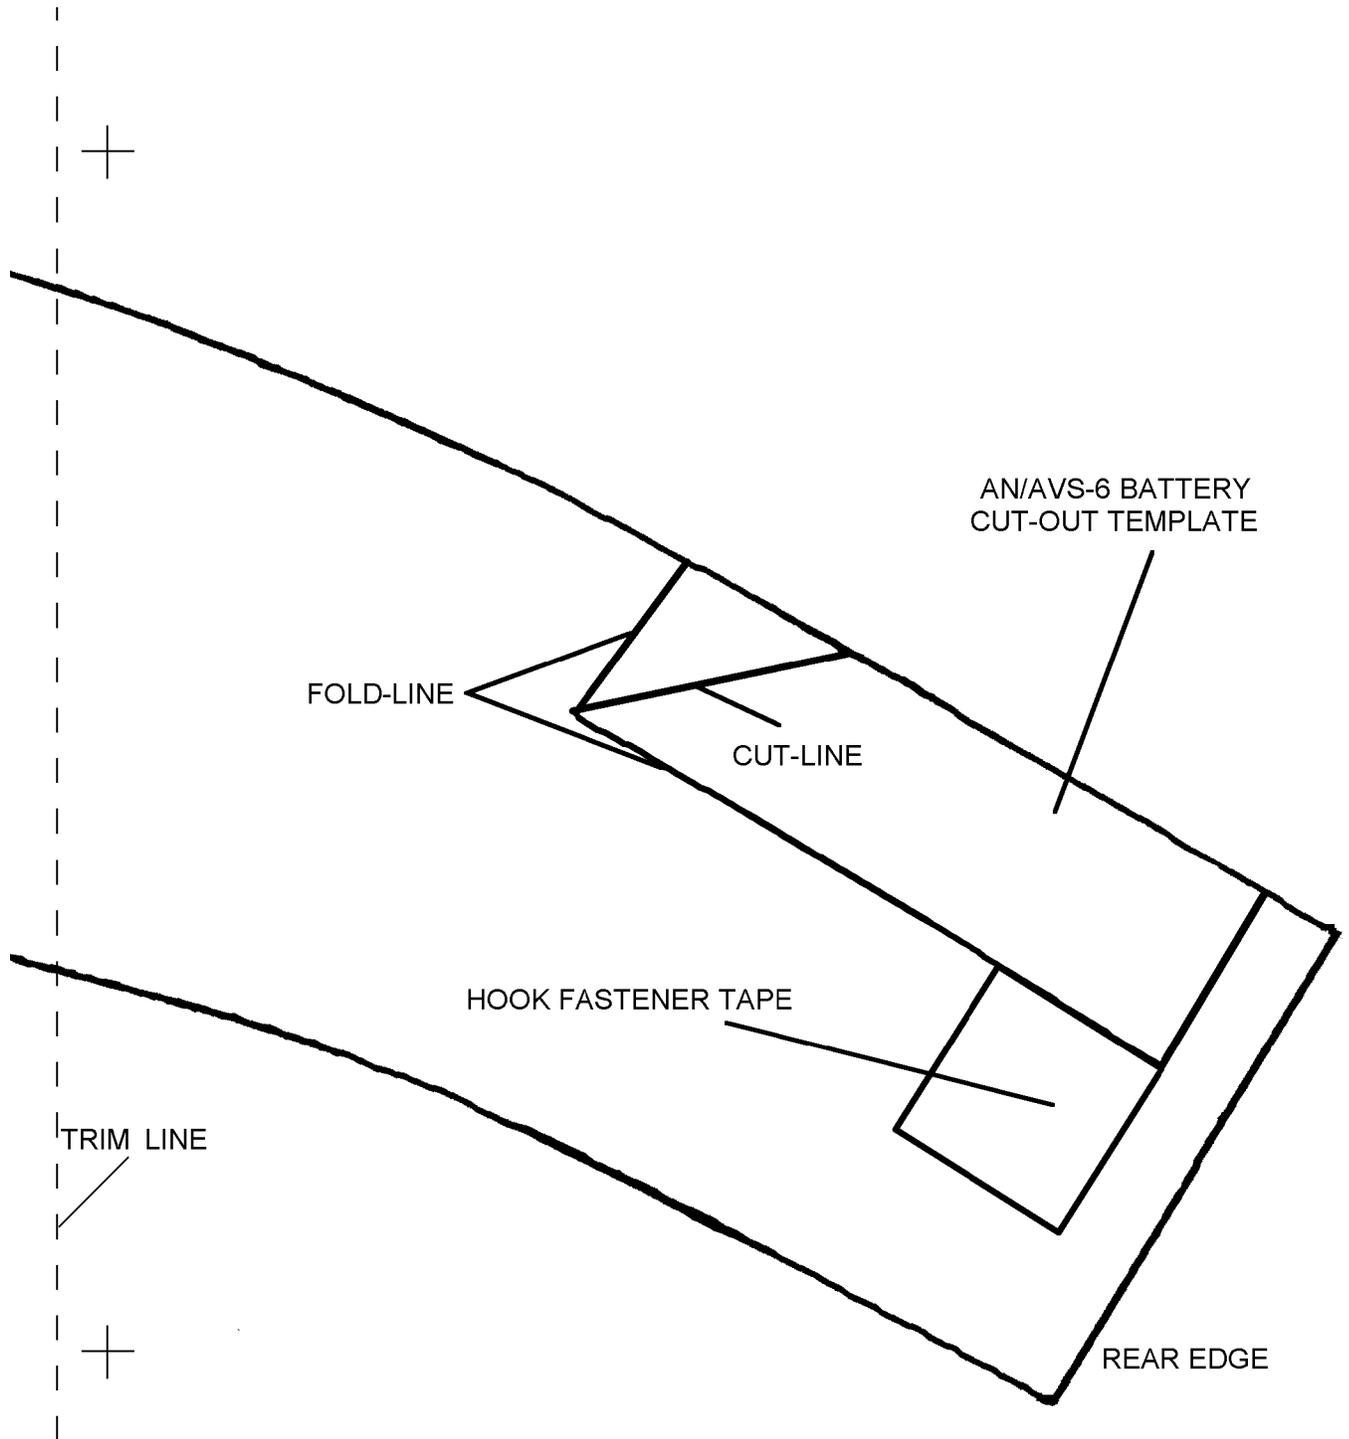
Removable Camouflage Helmet Cover (Extra-Large) (3 of 5)
